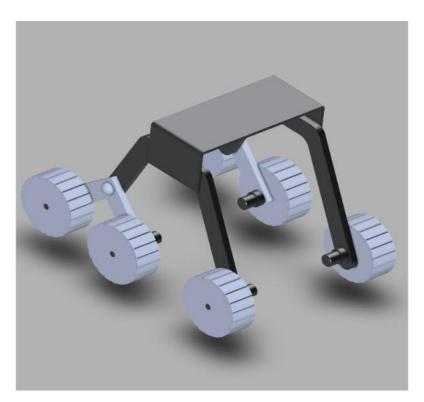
ROCKER BOGIE ISOMETRIC VIEW
